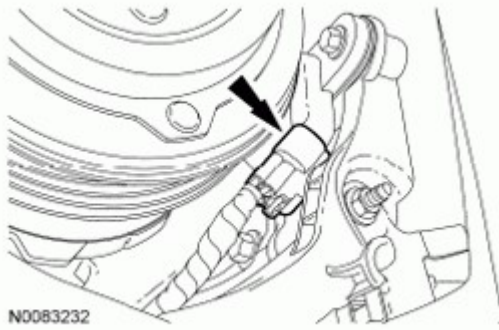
Locating Crankshaft Position (CKP) Sensor Electrical Connector
